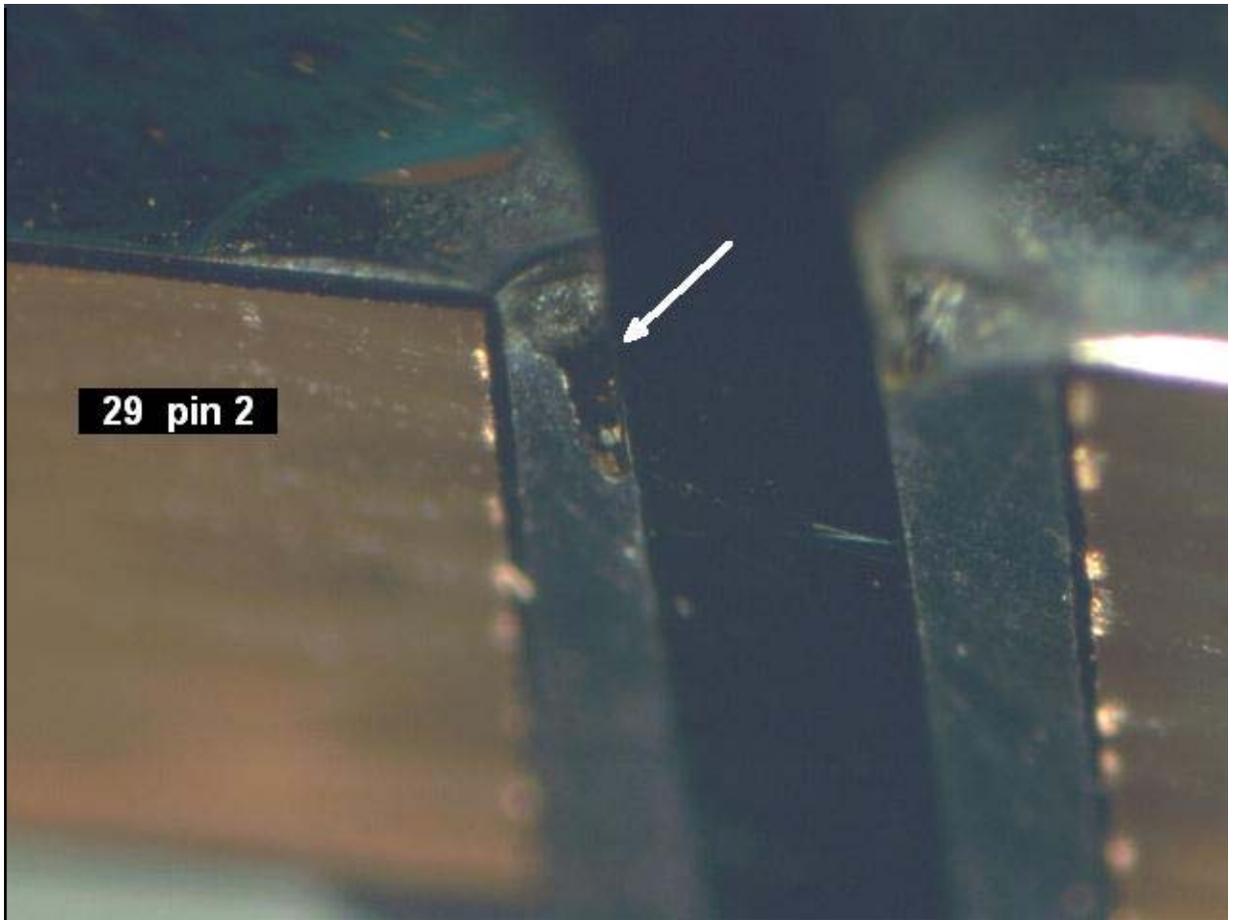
Angled view showing the gap at the top of the hole where solder did not wet to the pin.
